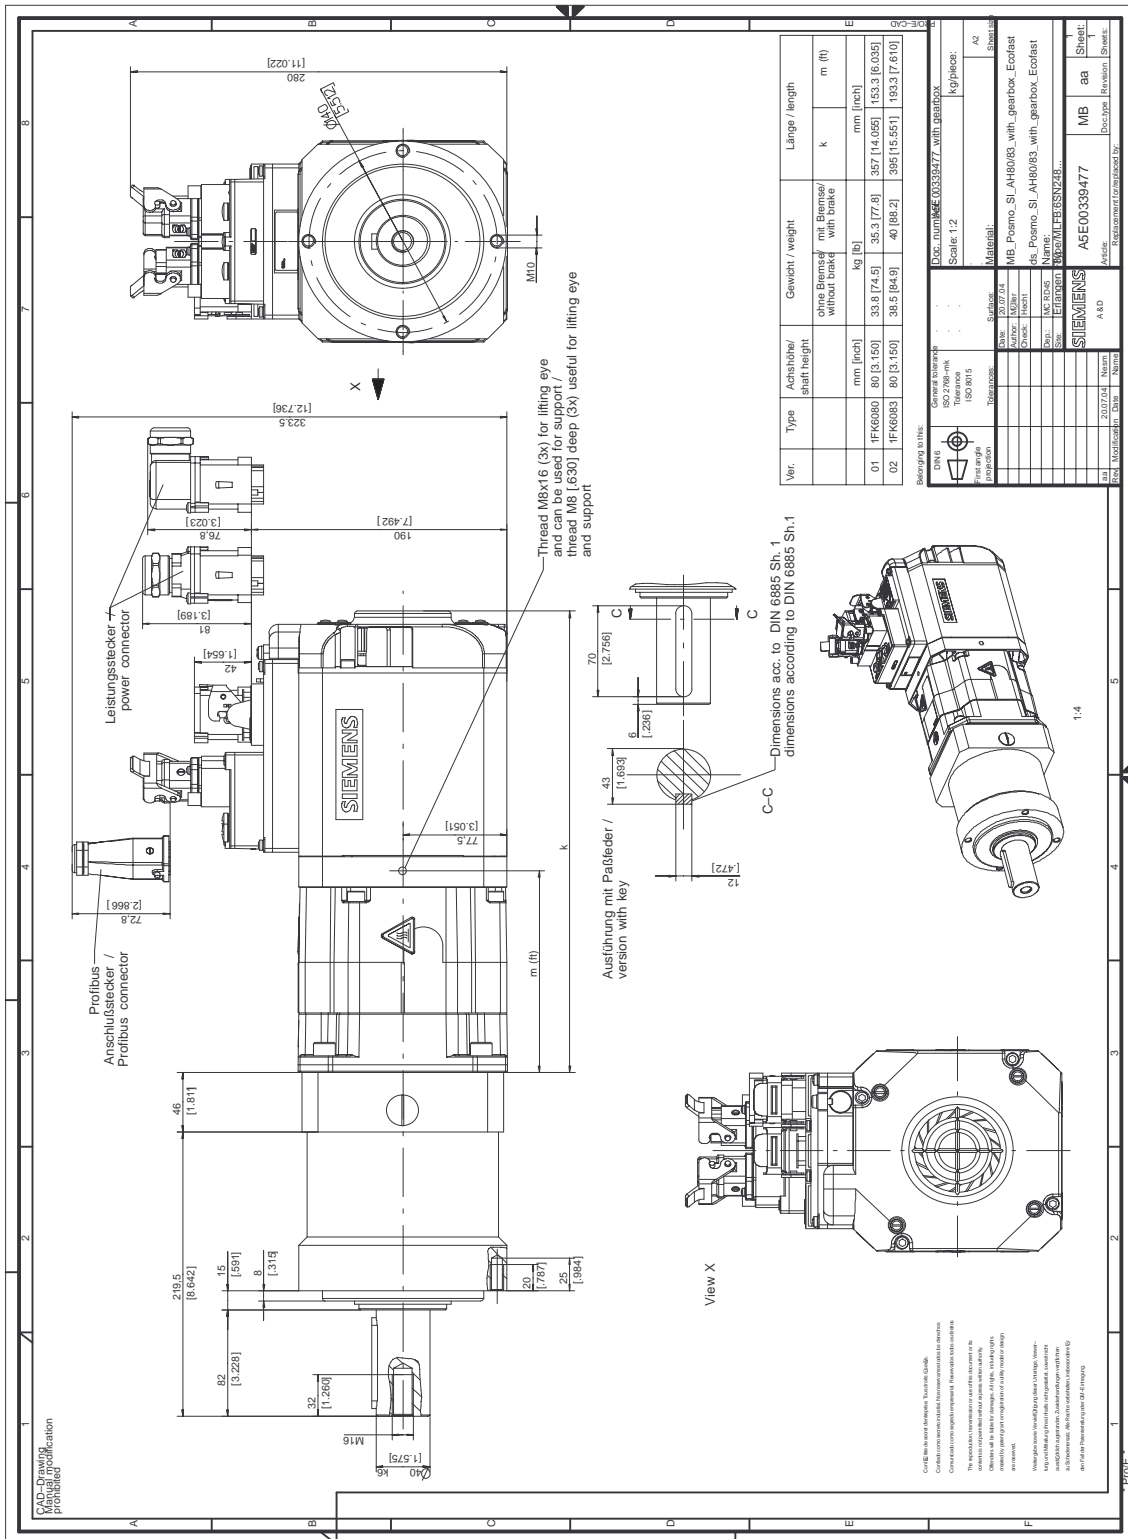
Dimension drawing POSMO SI 6SN248□-2CF□0-1G□□ with gearbox LP155-M01
